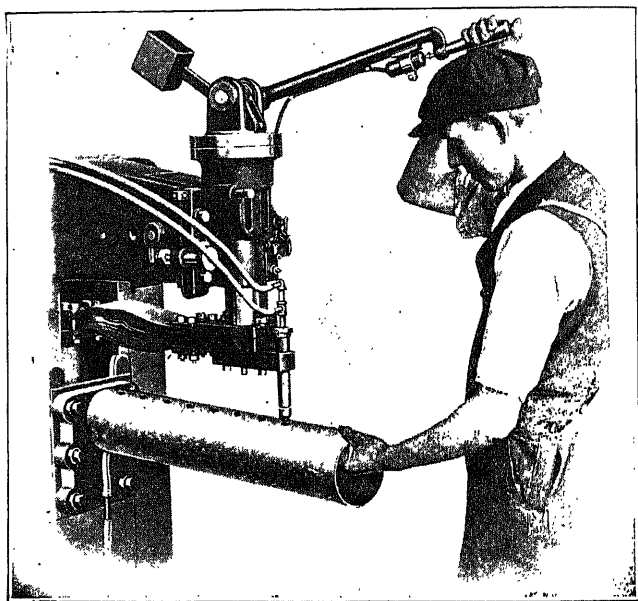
Welding Galvanized Iron Pipe.
